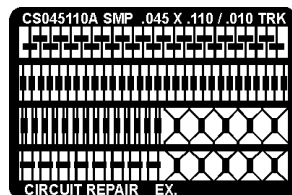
Select a replacement surface mount pad that matches the missing pad.
